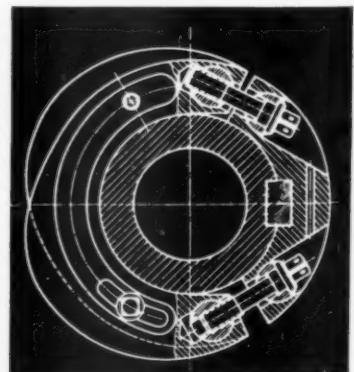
Method of altering pump timing; part of cam ring is keyed to camshaft and is connected to cam proper by adjusting bolts.
